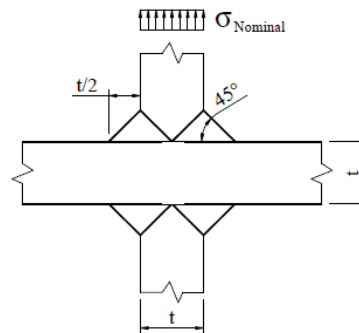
Full penetration welded cruciform joint for evaluation of weld root fatigue (DNV, 2012)
